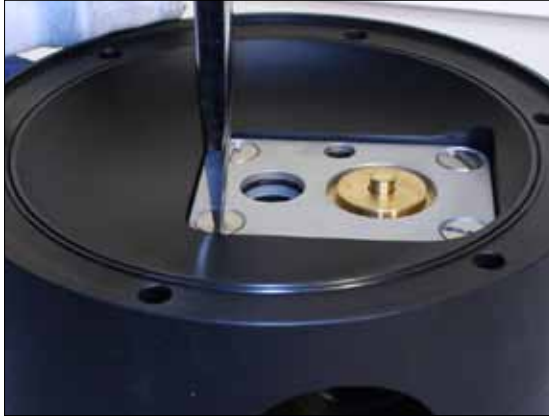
Press out the cylinder, be careful not to damage the edges of the cylinder.
